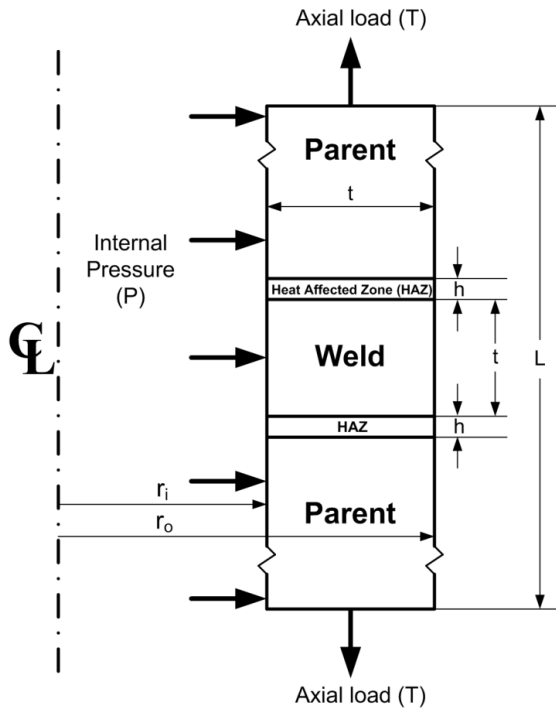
Schematic of welded straight pipe showing the relevant geometric variables
